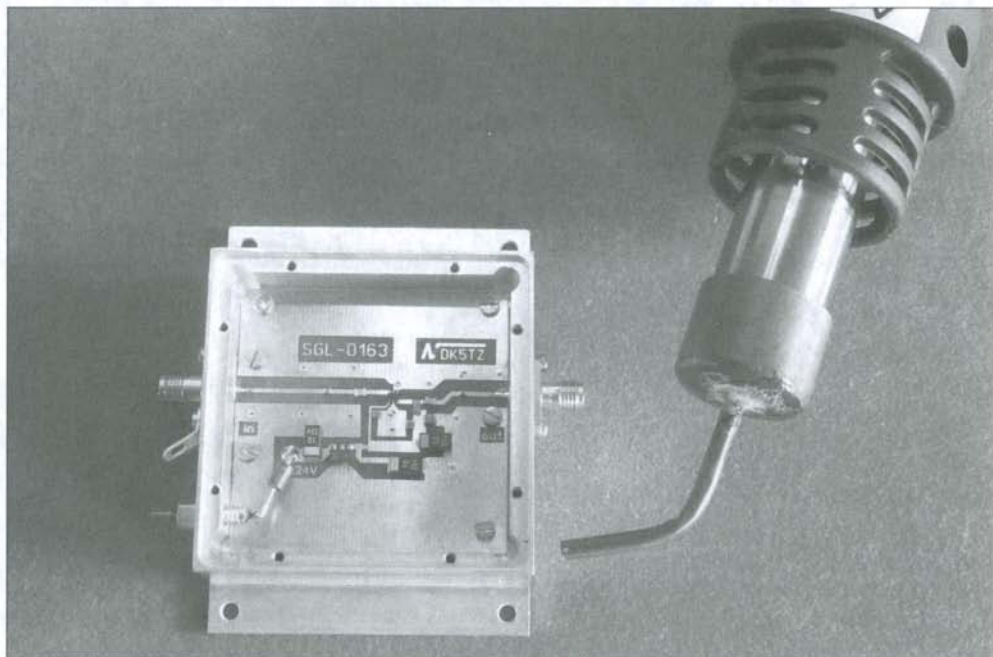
SGL-0163 preamplifier with hot air soldering tool
